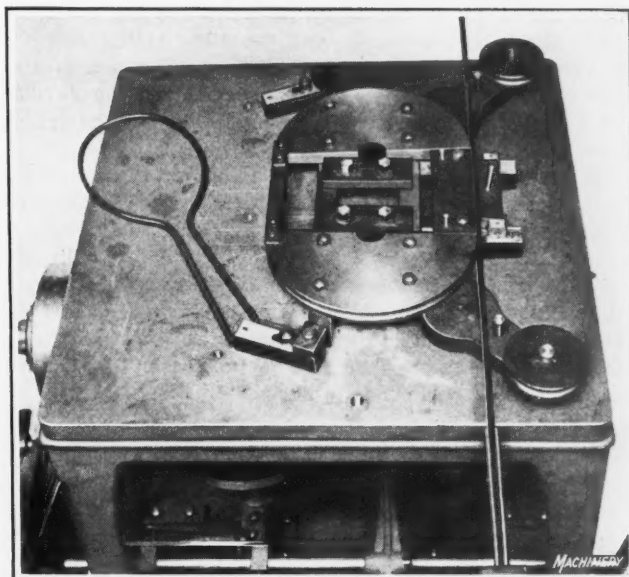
Tool Set-up for the Preliminary Bending Operation
